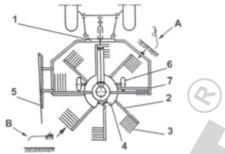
1-rotor carousel raker – general view, 1 – frame, 2 – arms, 3 – spring fingers, 4 – cranked shaft with rollers, 5 – shield, 6 – supporting wheels, 7 – protective barriers, A – vertical setting of fingers (beginning of raking), B – horizontal setting of fingers (end of raking)
